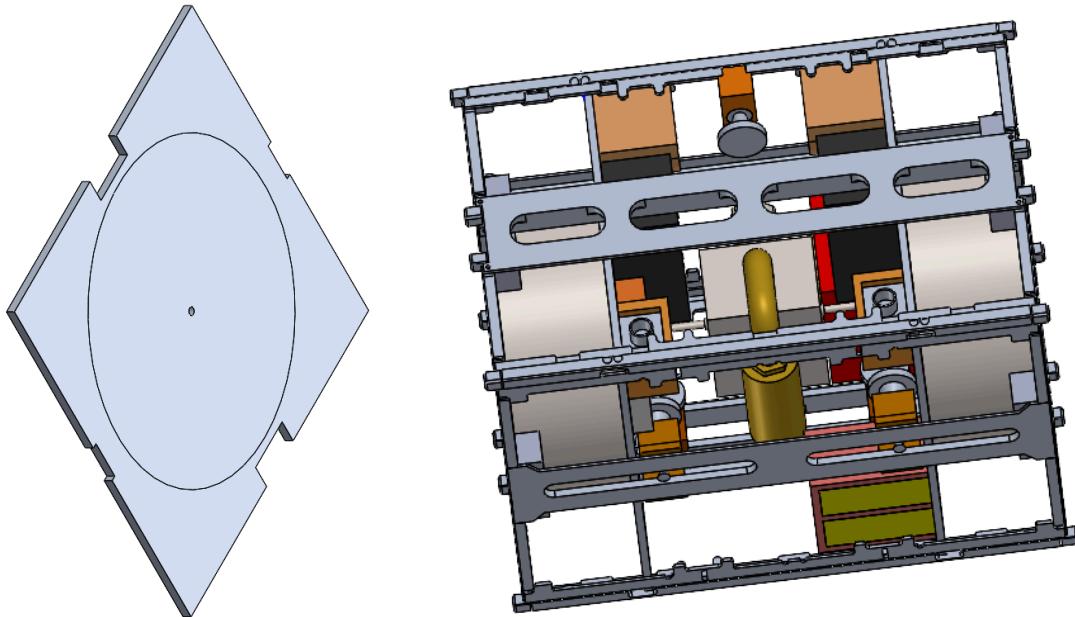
Bulkhead Concept (Left) and Assembly (Right)
